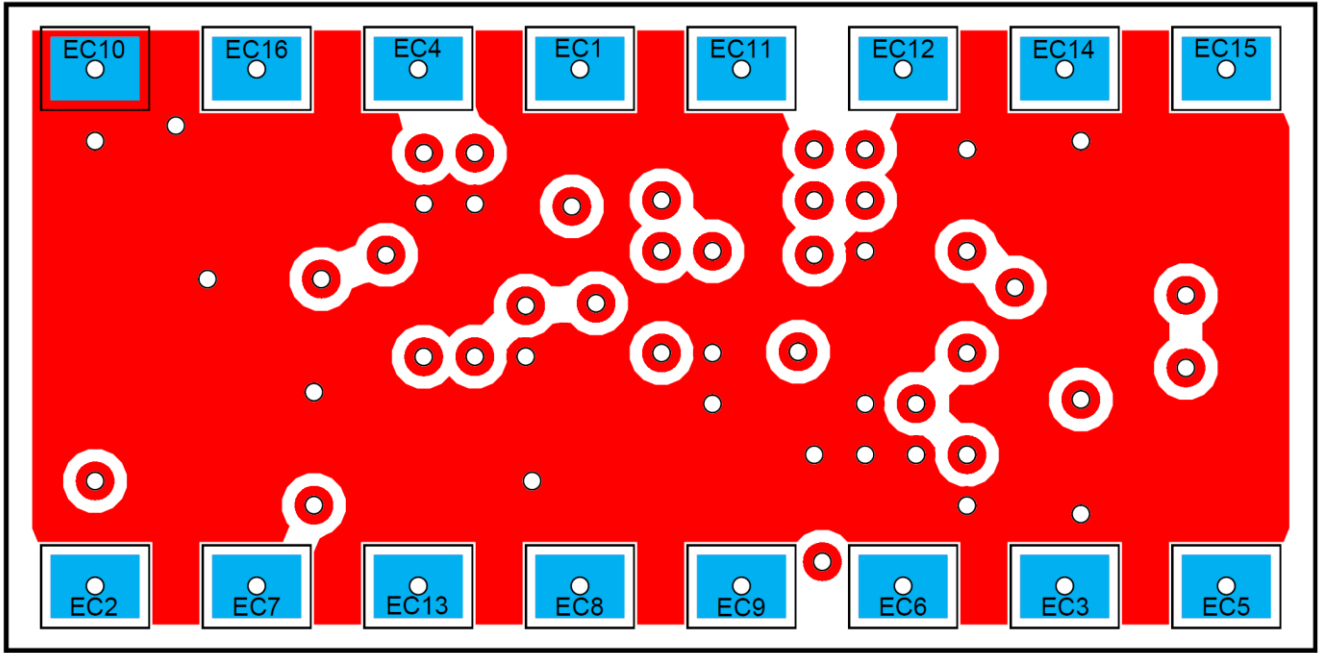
Reference Design 2: Mini Module - Assembly View BOT
